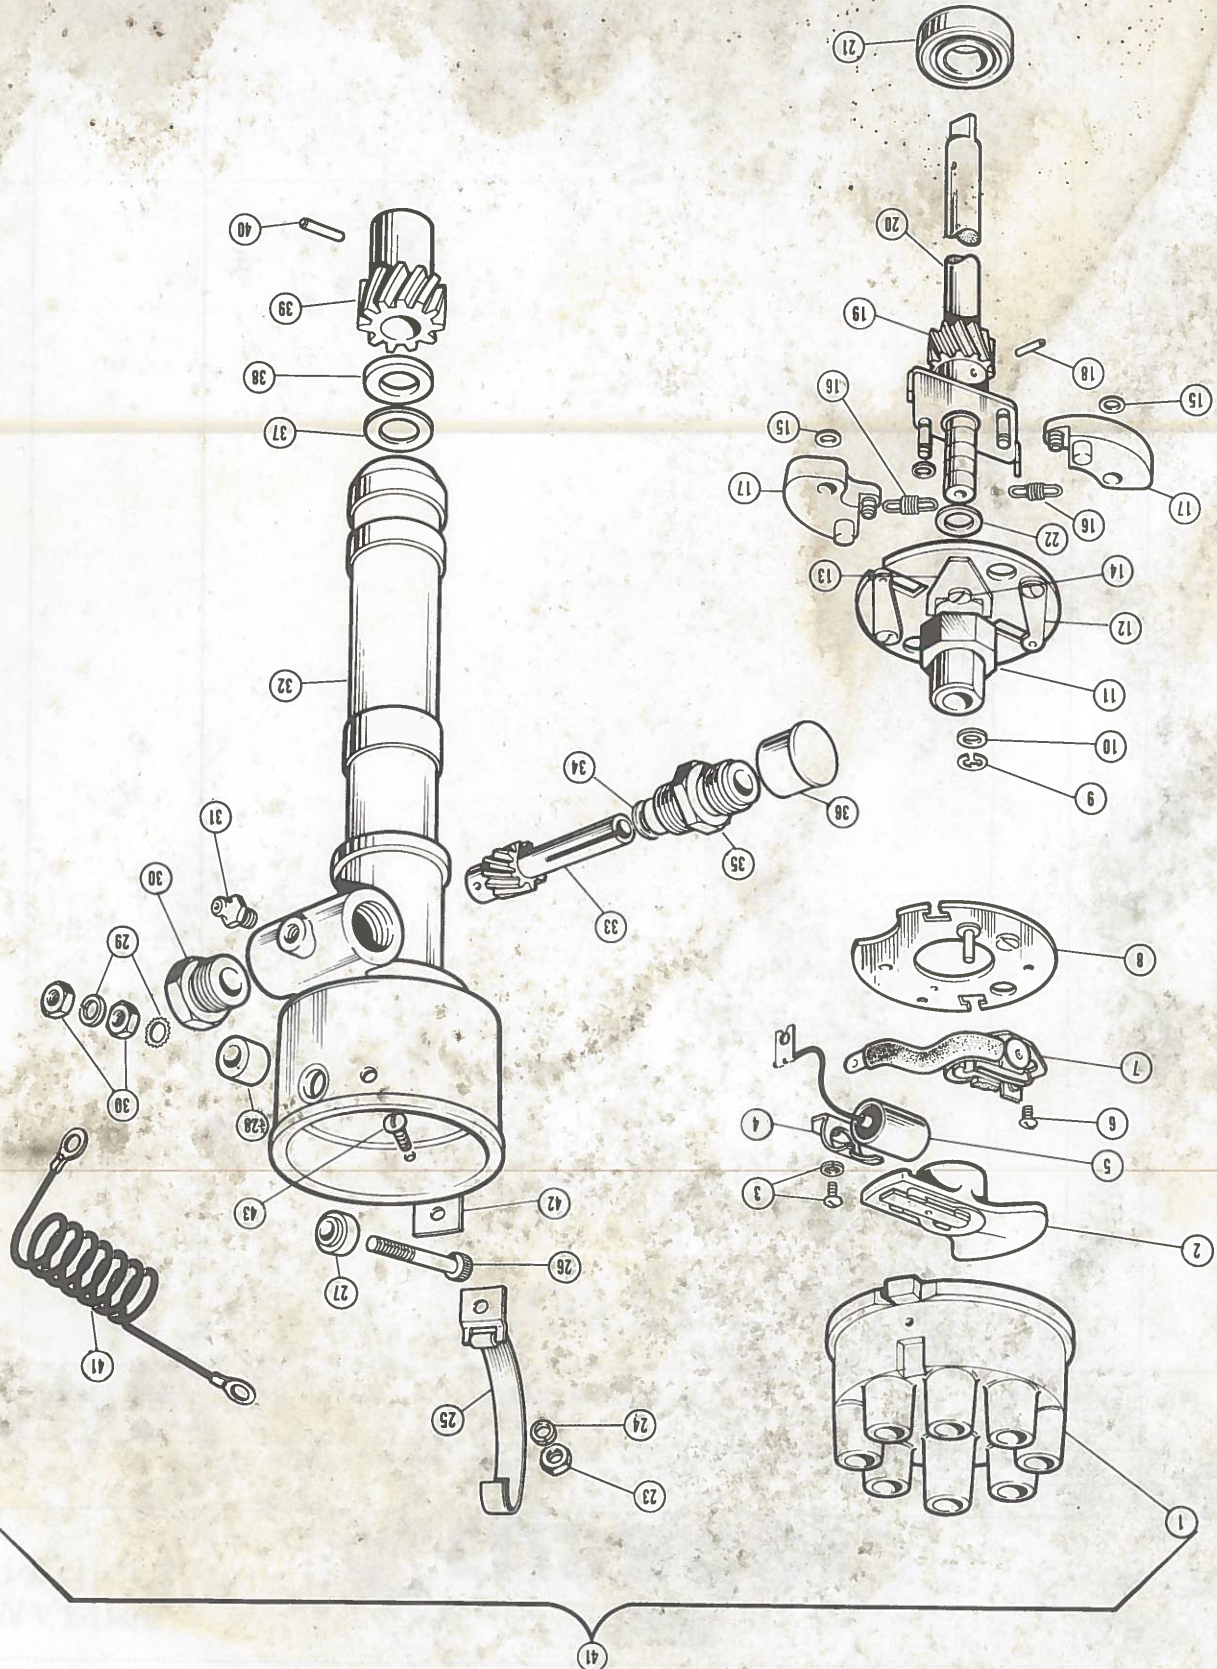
MALLOY TACH. DRIVE DISTRIBUTOR ASSEMBLY
